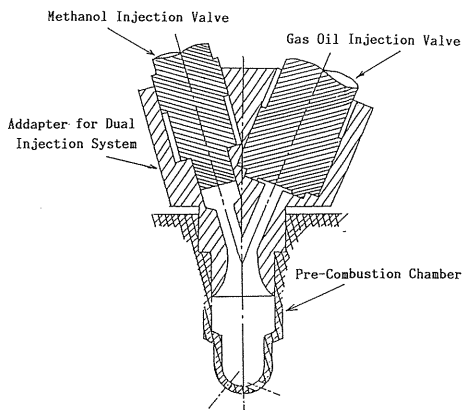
Shape of Pre-Combustion Chamber and Dual Injection Adapter
